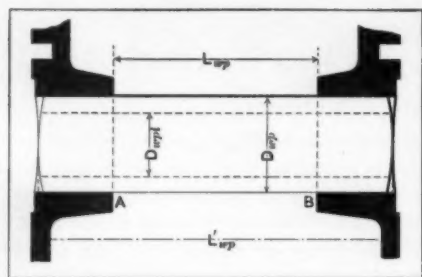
Cross-sectional view of a piston, showing the wrist pin and the different dimensions used in calculating the dimensions of same
